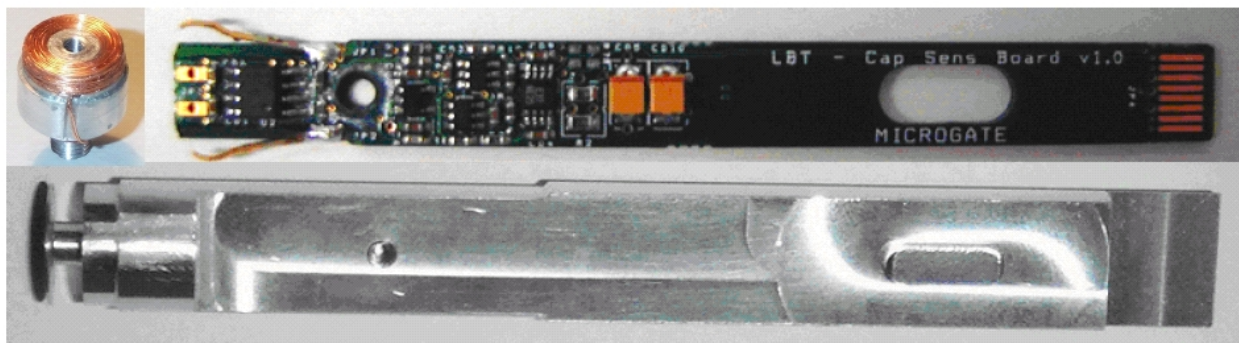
Components of the LBT actuator. Upper left: electromagnet coil head, 11 mm in diameter. Upper right: capacitive sensor board, 95 mm long, to be mounted on cold finger. Bottom: 108 mm cold finger.
